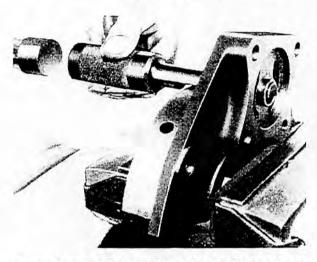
REMOVING THE ROTOR SHAFT BUSH FROM THE LOWER HALF BEARING HOUSING. SERVICE TOOL MF129
